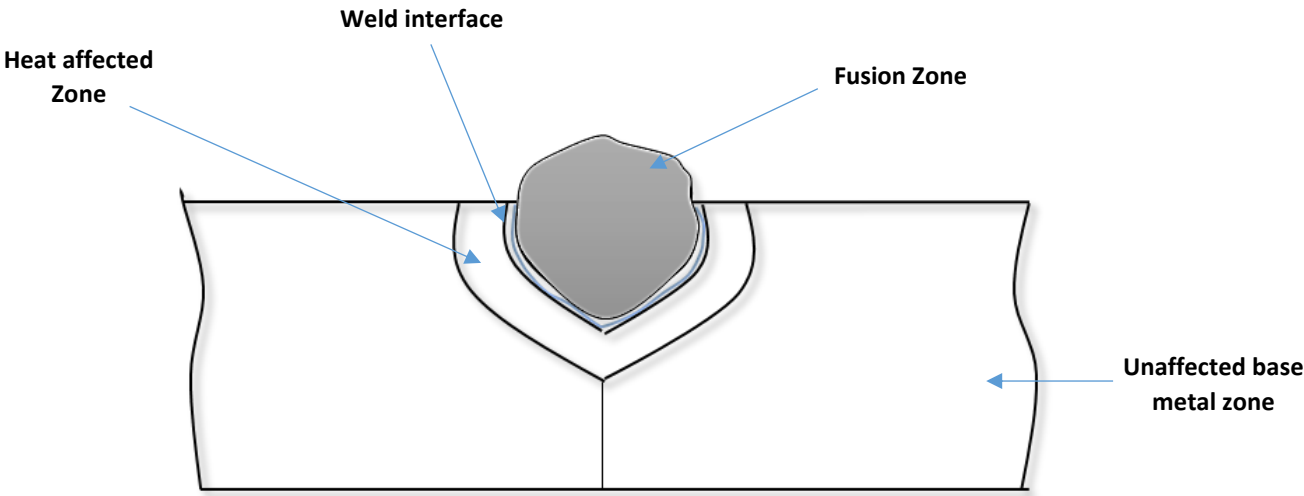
Schematic presentation of several zones in a fusion welded joint.
